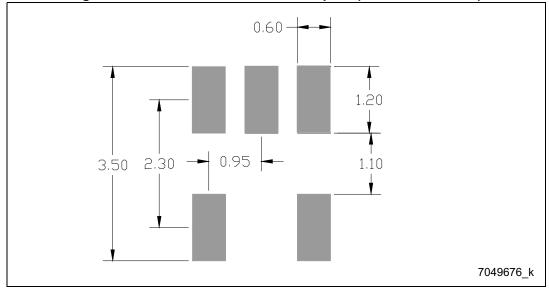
SOT23-5L recommended footprint (dimensions in mm)
